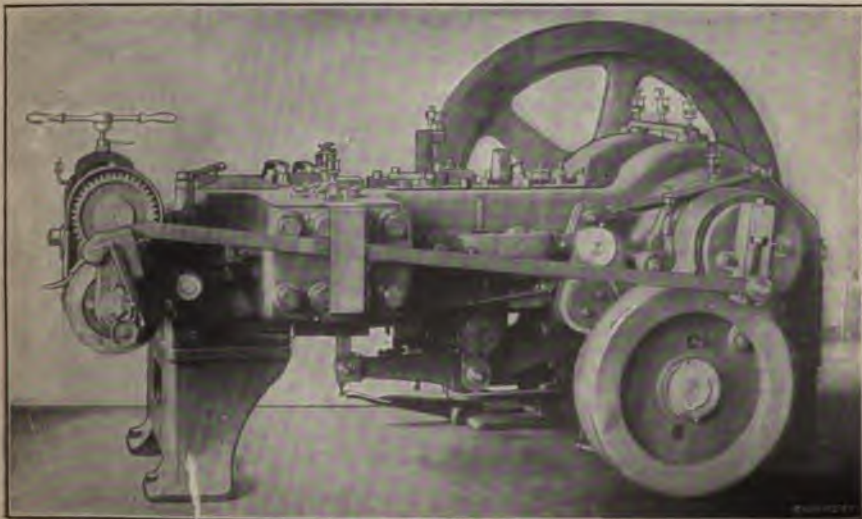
Double-stroke Open-die Cold-header—E. J. Manville Make
